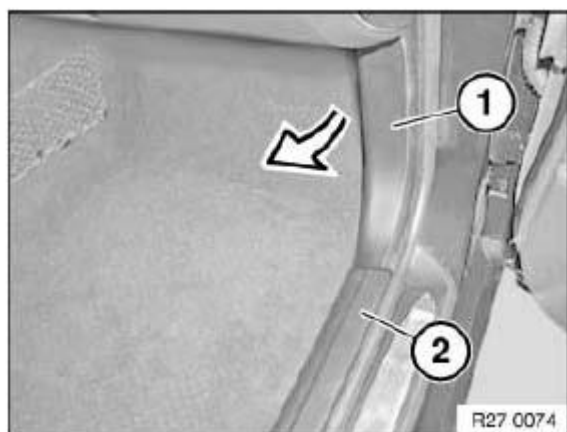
Identifying Side Trim Panel And Entrance Strip Trim
